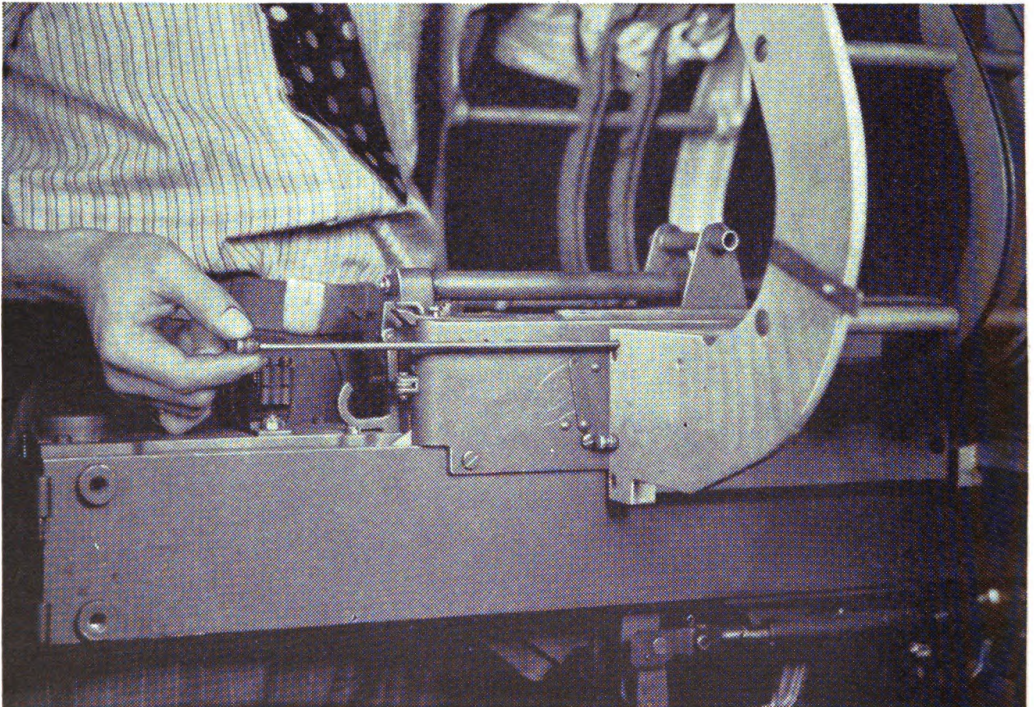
Removing bolts holding 30-round magazine to feed box.
